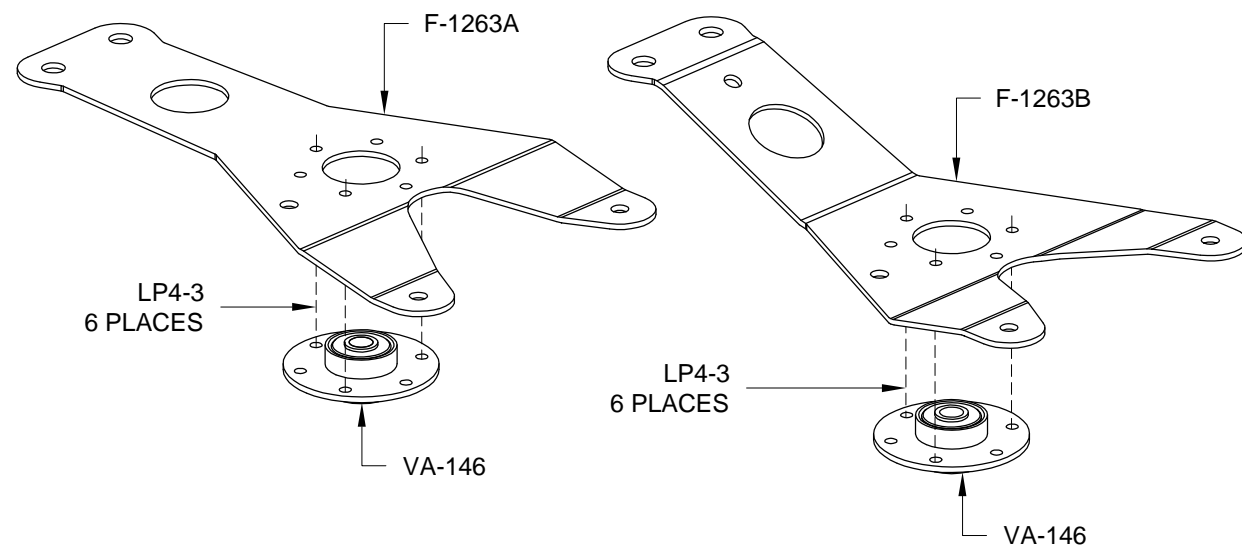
ATTACHING THE FLANGE BEARINGS
